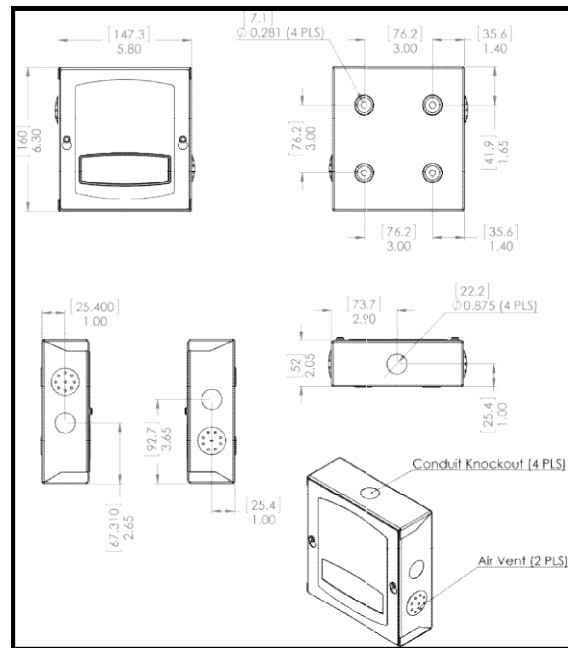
Screw-Down Front Panel Enclosure Dimensions
